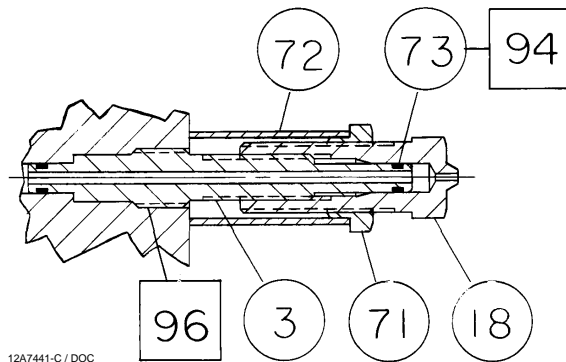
3582 and 3583 Series Positioners and Transmitters Assembly Drawing
